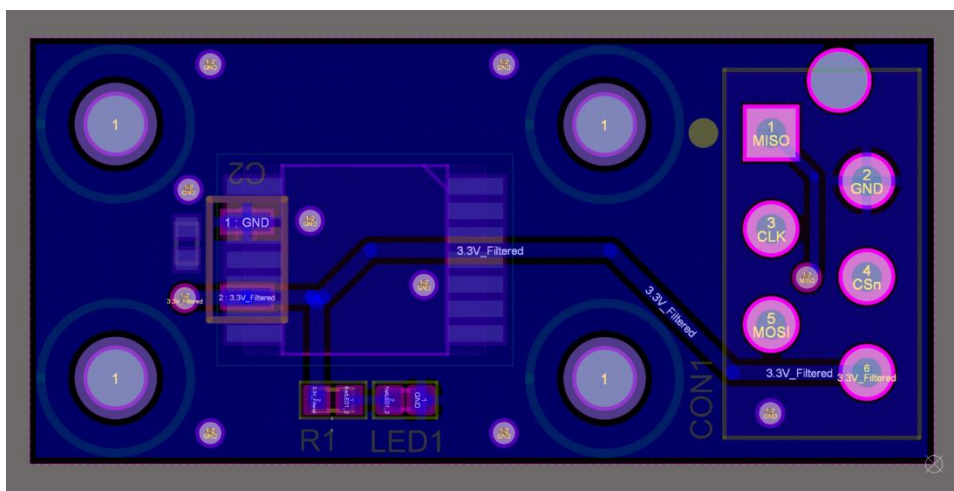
Back Layer Magnetic Encoder PCB Board View
